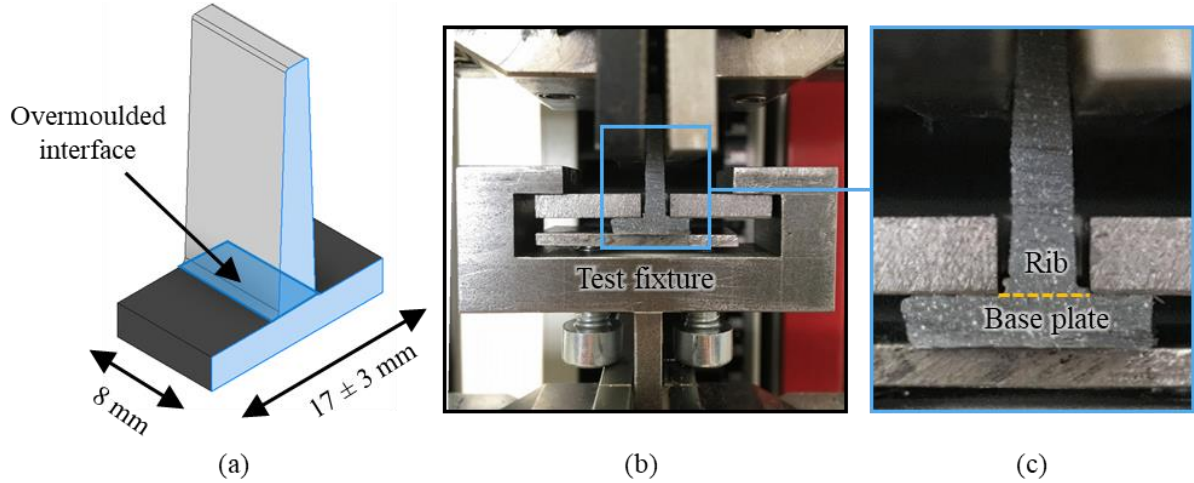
Mechanical specimen of Rib 3 (a) and setup of rib pull-off test (b), using custom built fixture for isolating the overmoulded interface (c).
